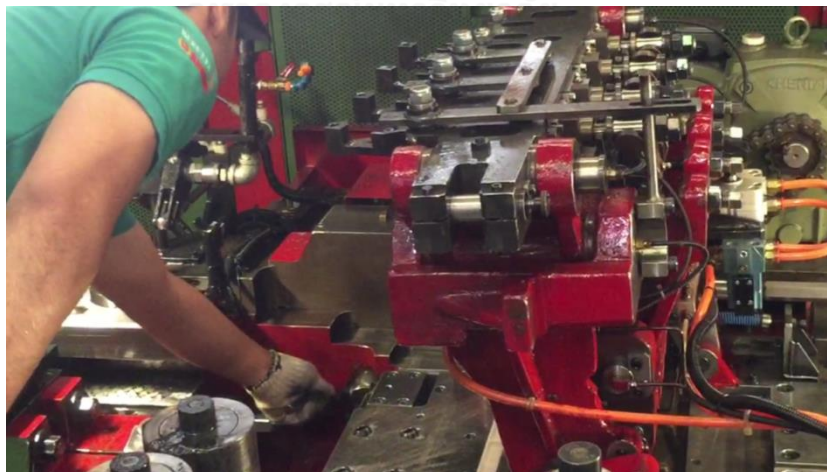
Step 7 Dismount the previous wire toolings out of machine
